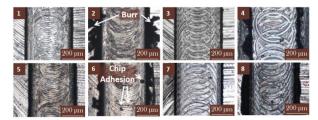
Surface morphology and burrs in dry cutting; cutting conditions 1-8 (6^{th} groove).
